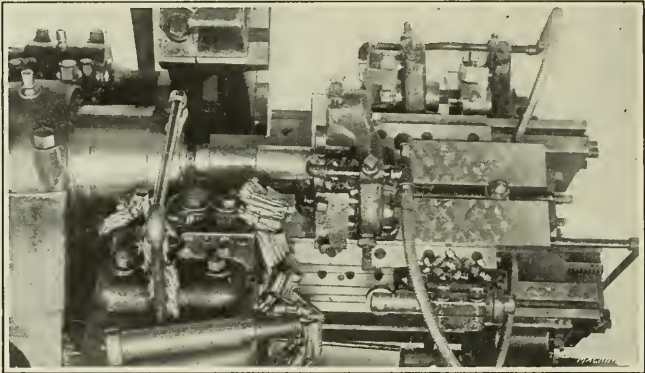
Standard Turner and Flat Forming Tool working together on Shoulder Screw
